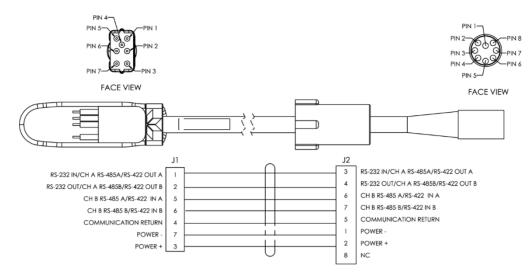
Conversion Cable (0.5 meter) Wiring 737-3171-00
